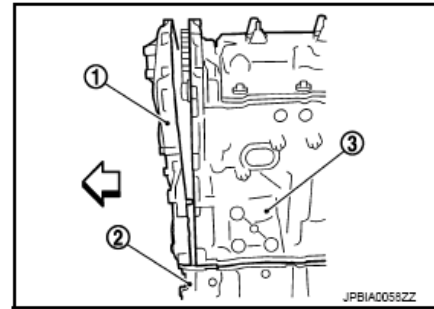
Identifying Front Timing Chain Case, Upper Oil Pan And Cylinder Block
